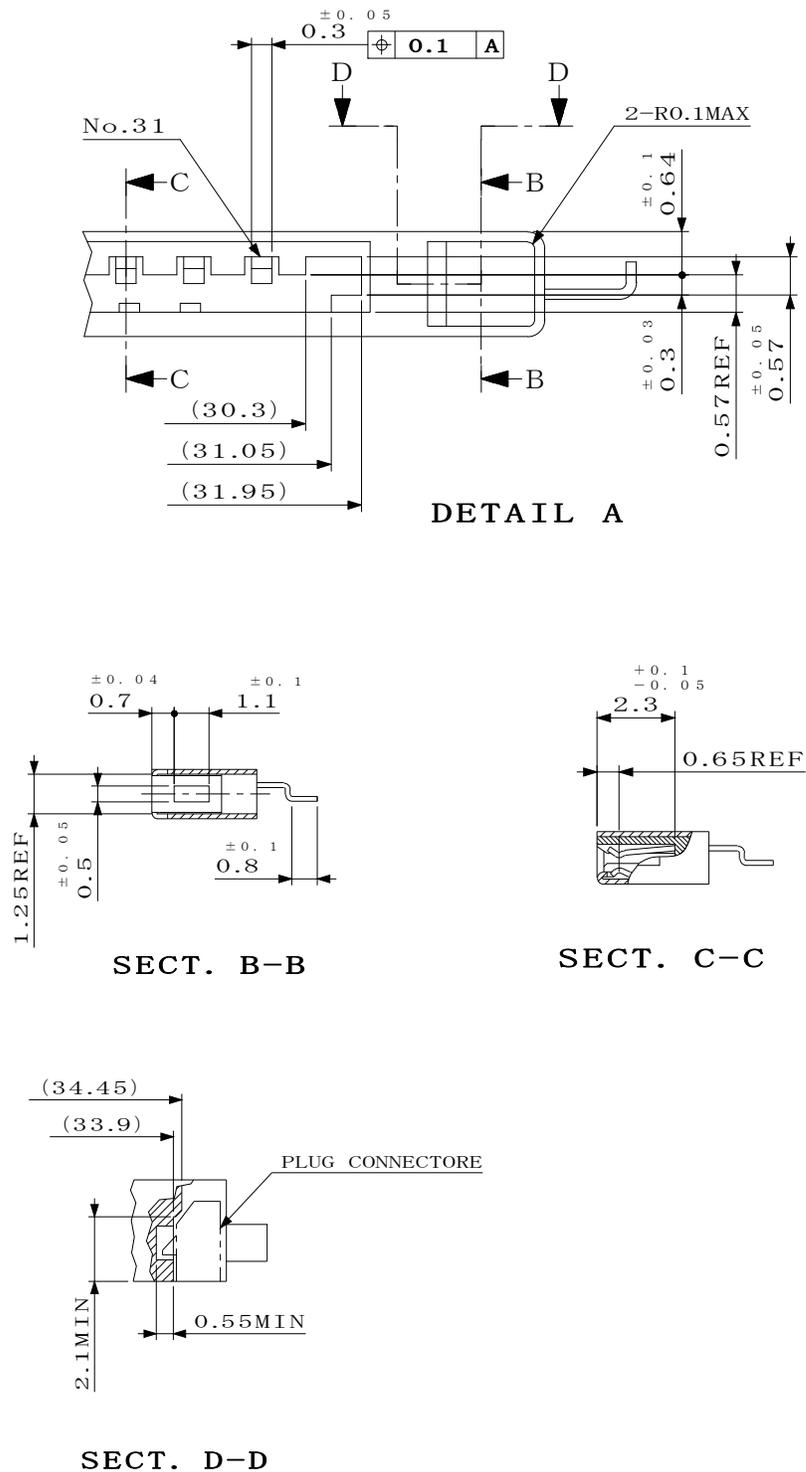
Panel-side Internal PCB Mount Receptacle Connector (in unit of mm)
